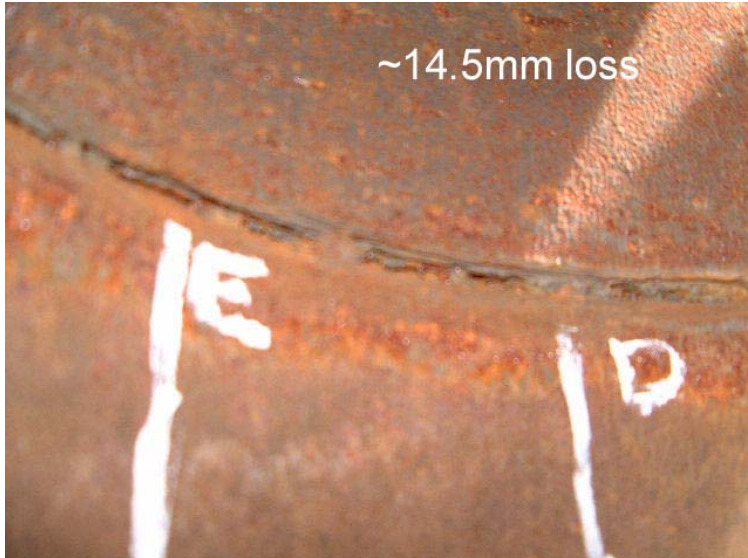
Close-up of pipe weld at points D and E, physical depth of corrosion 14.5mm.
